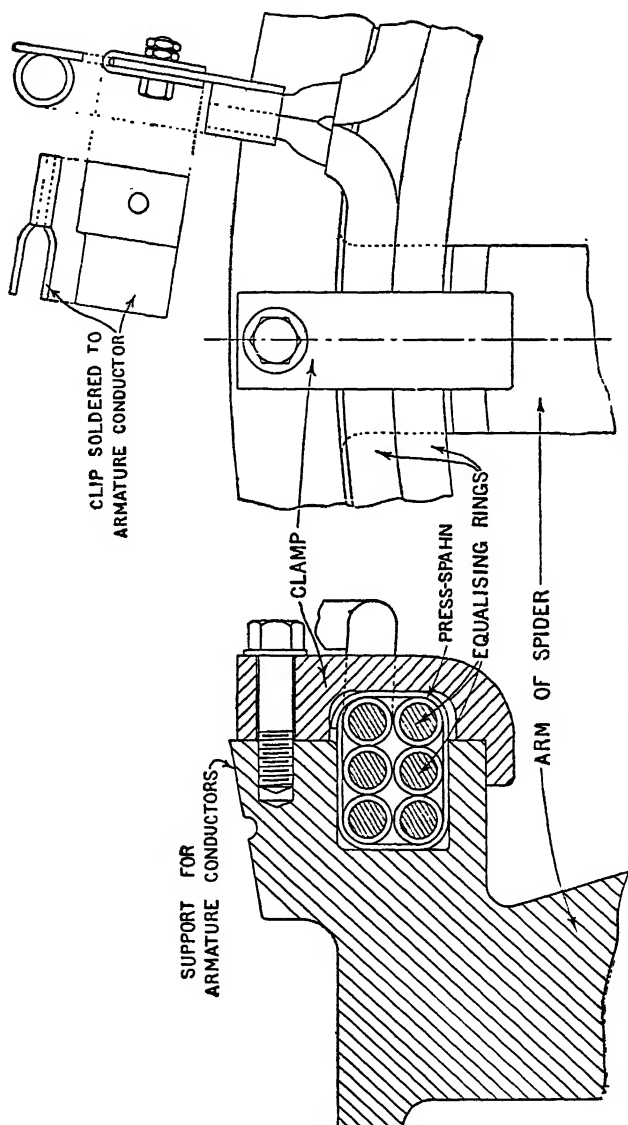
Detachable equalising rings (Crompton & Co., Ltd.).
